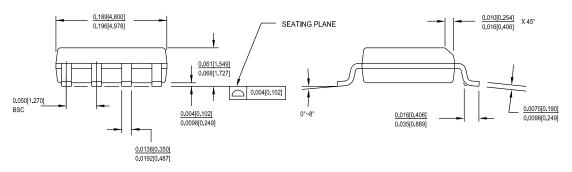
8-pin SOIC (150 Mils) Package Outline, 51-85066
